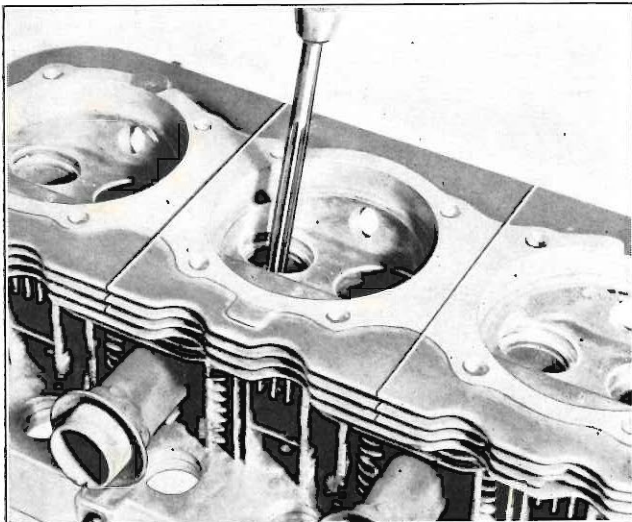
J-5830-5 Reamer (.020 oversize valves)
